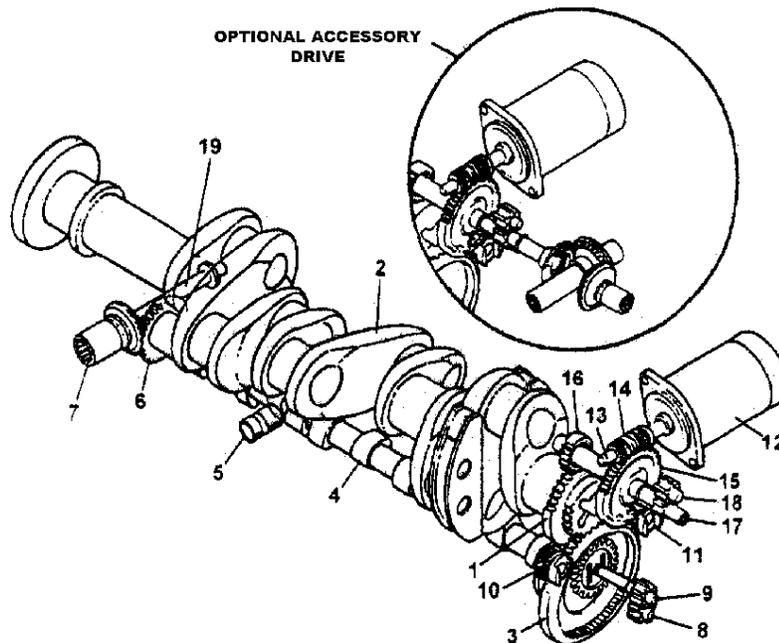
ENGINE DRIVE TRAIN DESCRIPTION
